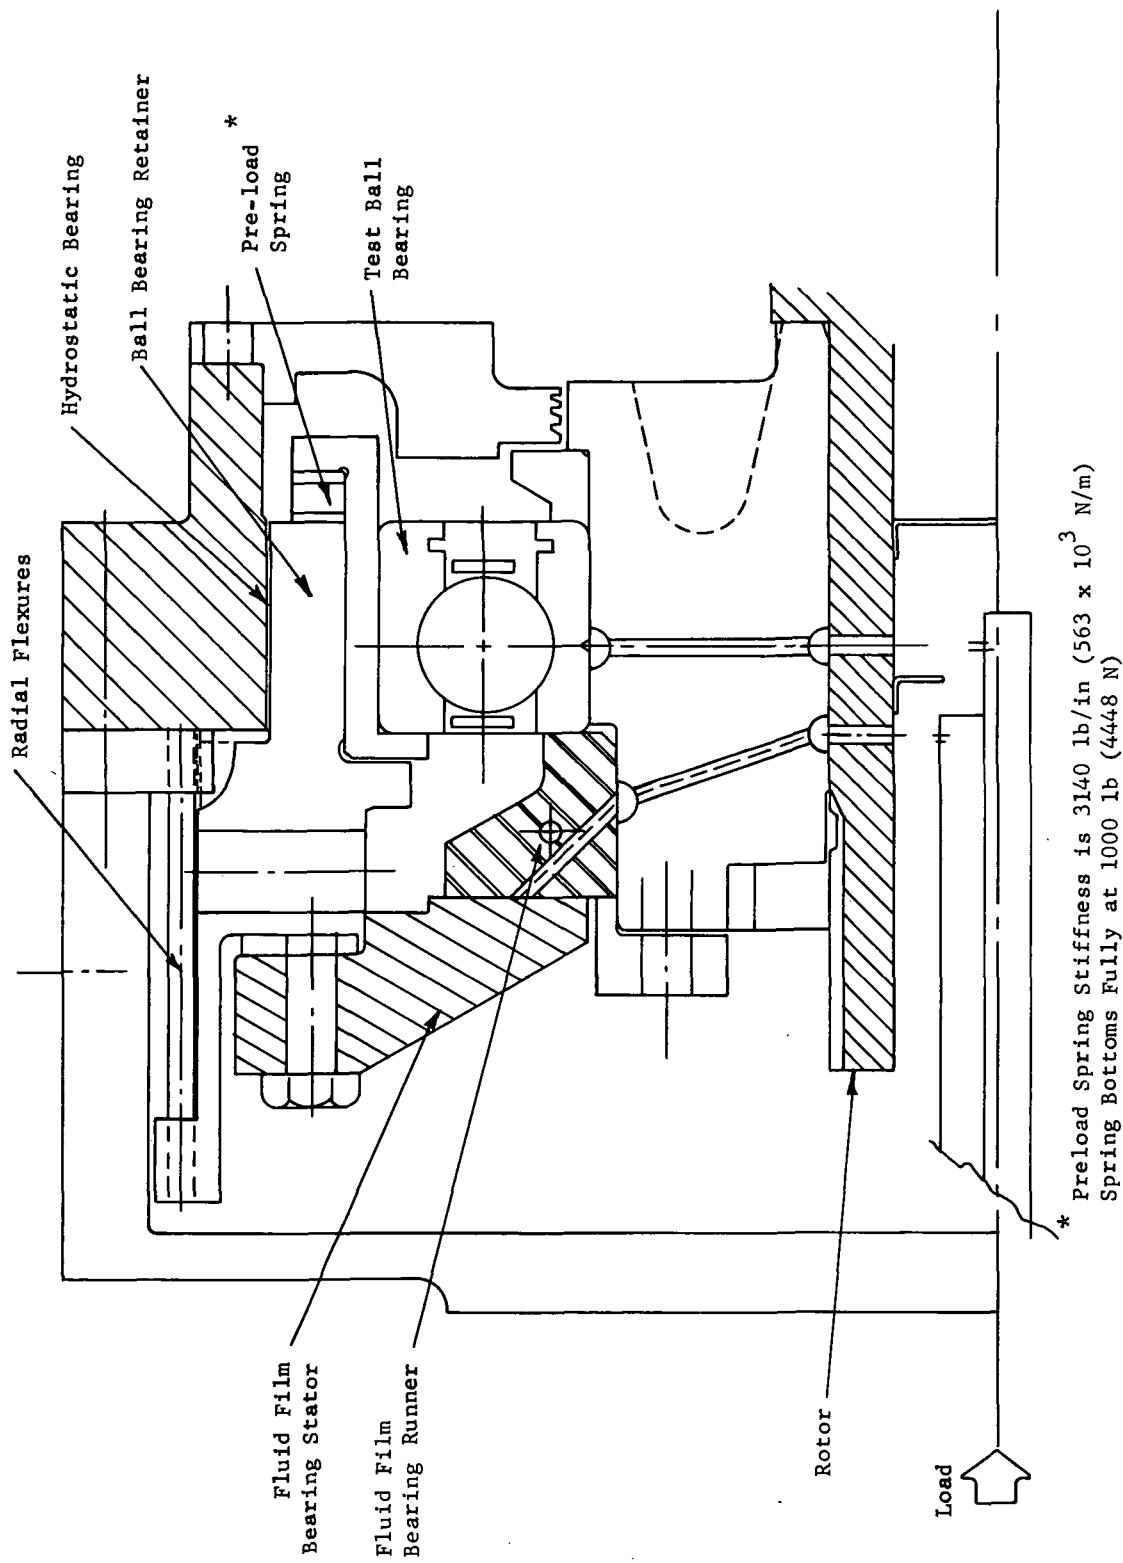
Flexure Supported Hybrid Bearing Including Damper Bearing
